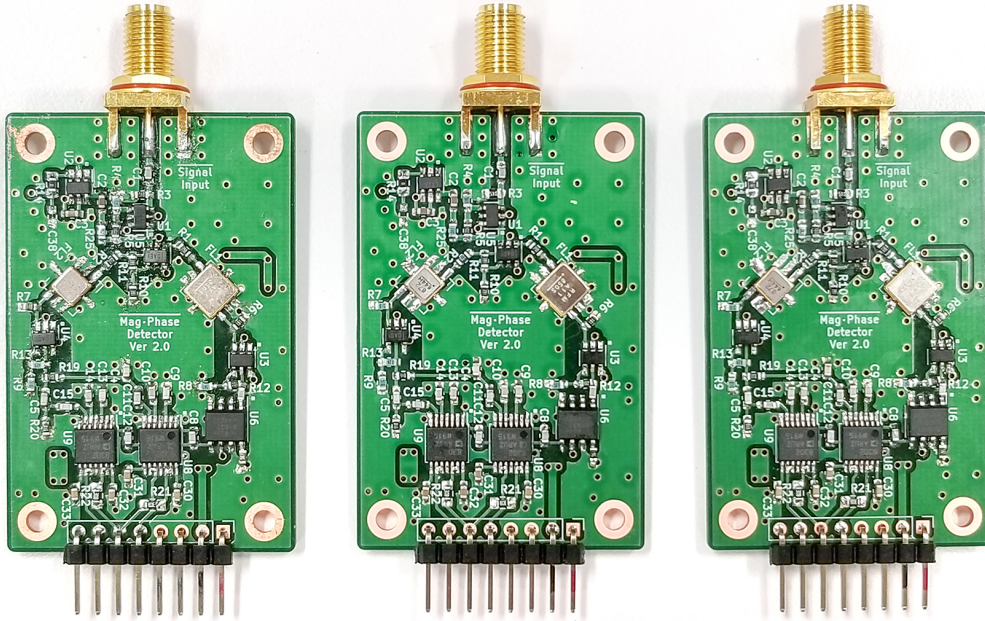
The fully assembled PCB of the detector part. We prepared three pieces for the evaluation. The square shaped metal pieces are the SAW filters used in our design.
